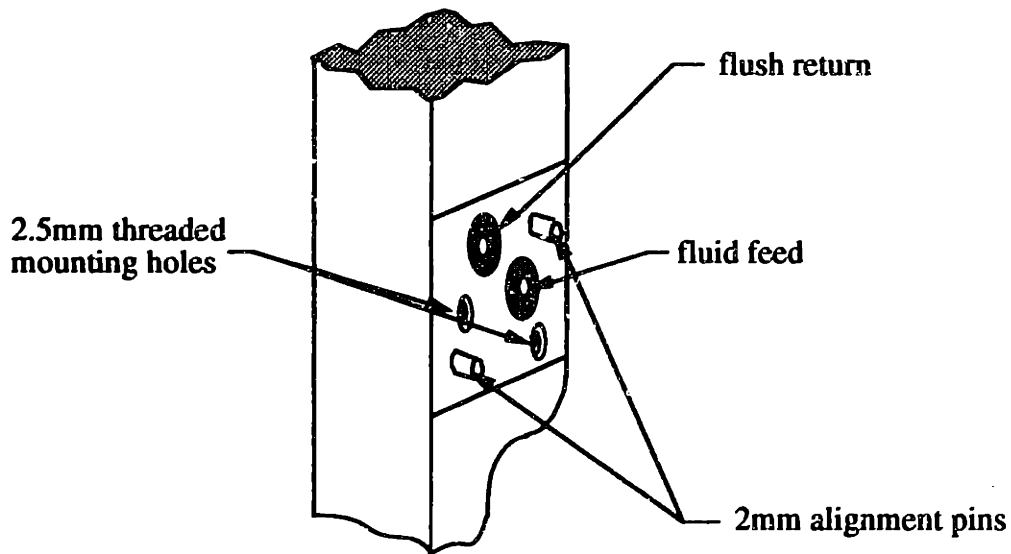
A close-up view of the droplet generator mounting scheme.
